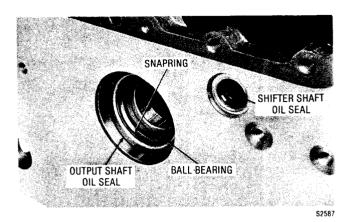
Output shaft front bearing and sealring (-1 models)
